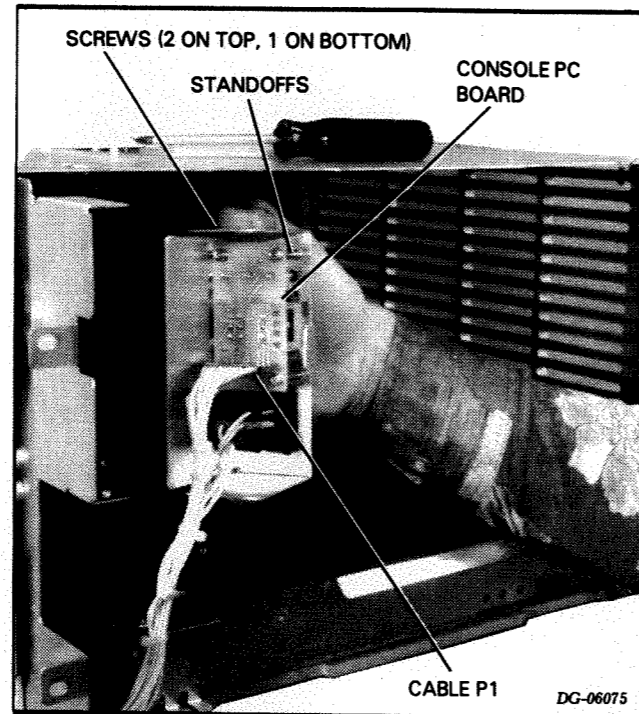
REMOVING THE CONSOLE PC BOARD (16-SLOT CHASSIS)
